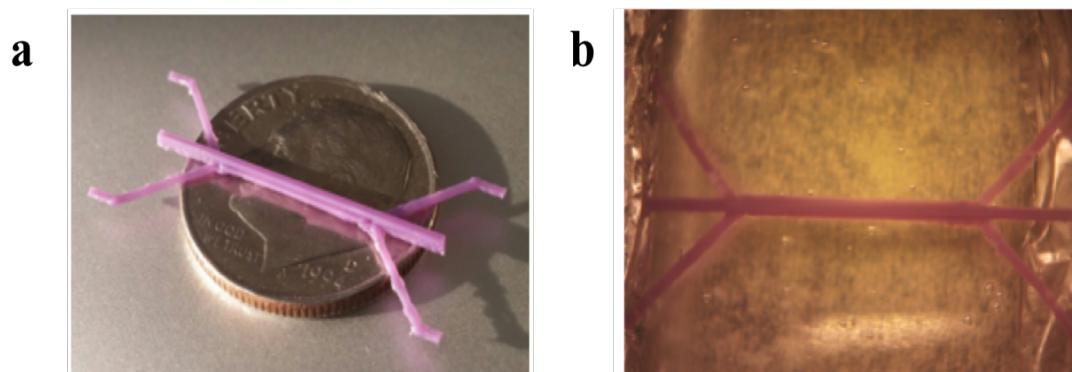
Optical images of (a) a master structure obtained by 3D printing and (b) the replica mold of the 3D printed master structure
